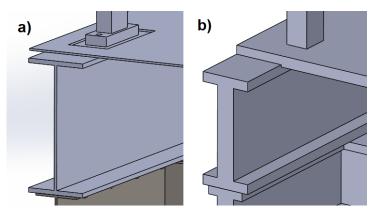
The beam profile supporting the optical sorter: a) original CAD; b) CAD adapted for printing
